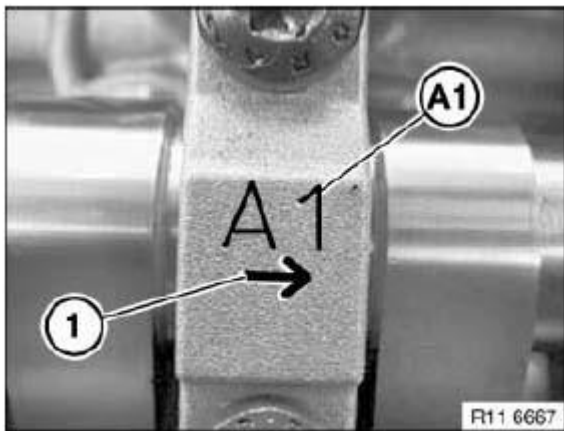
Positioning Exhaust Camshaft Lobs
